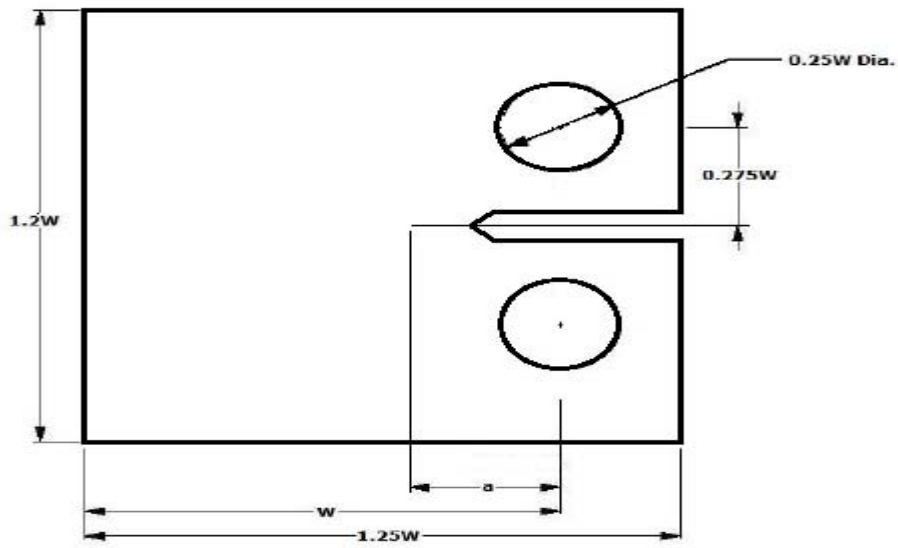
Compact Tension specimen showing geometry dimensions for the standard geometry model [11].
